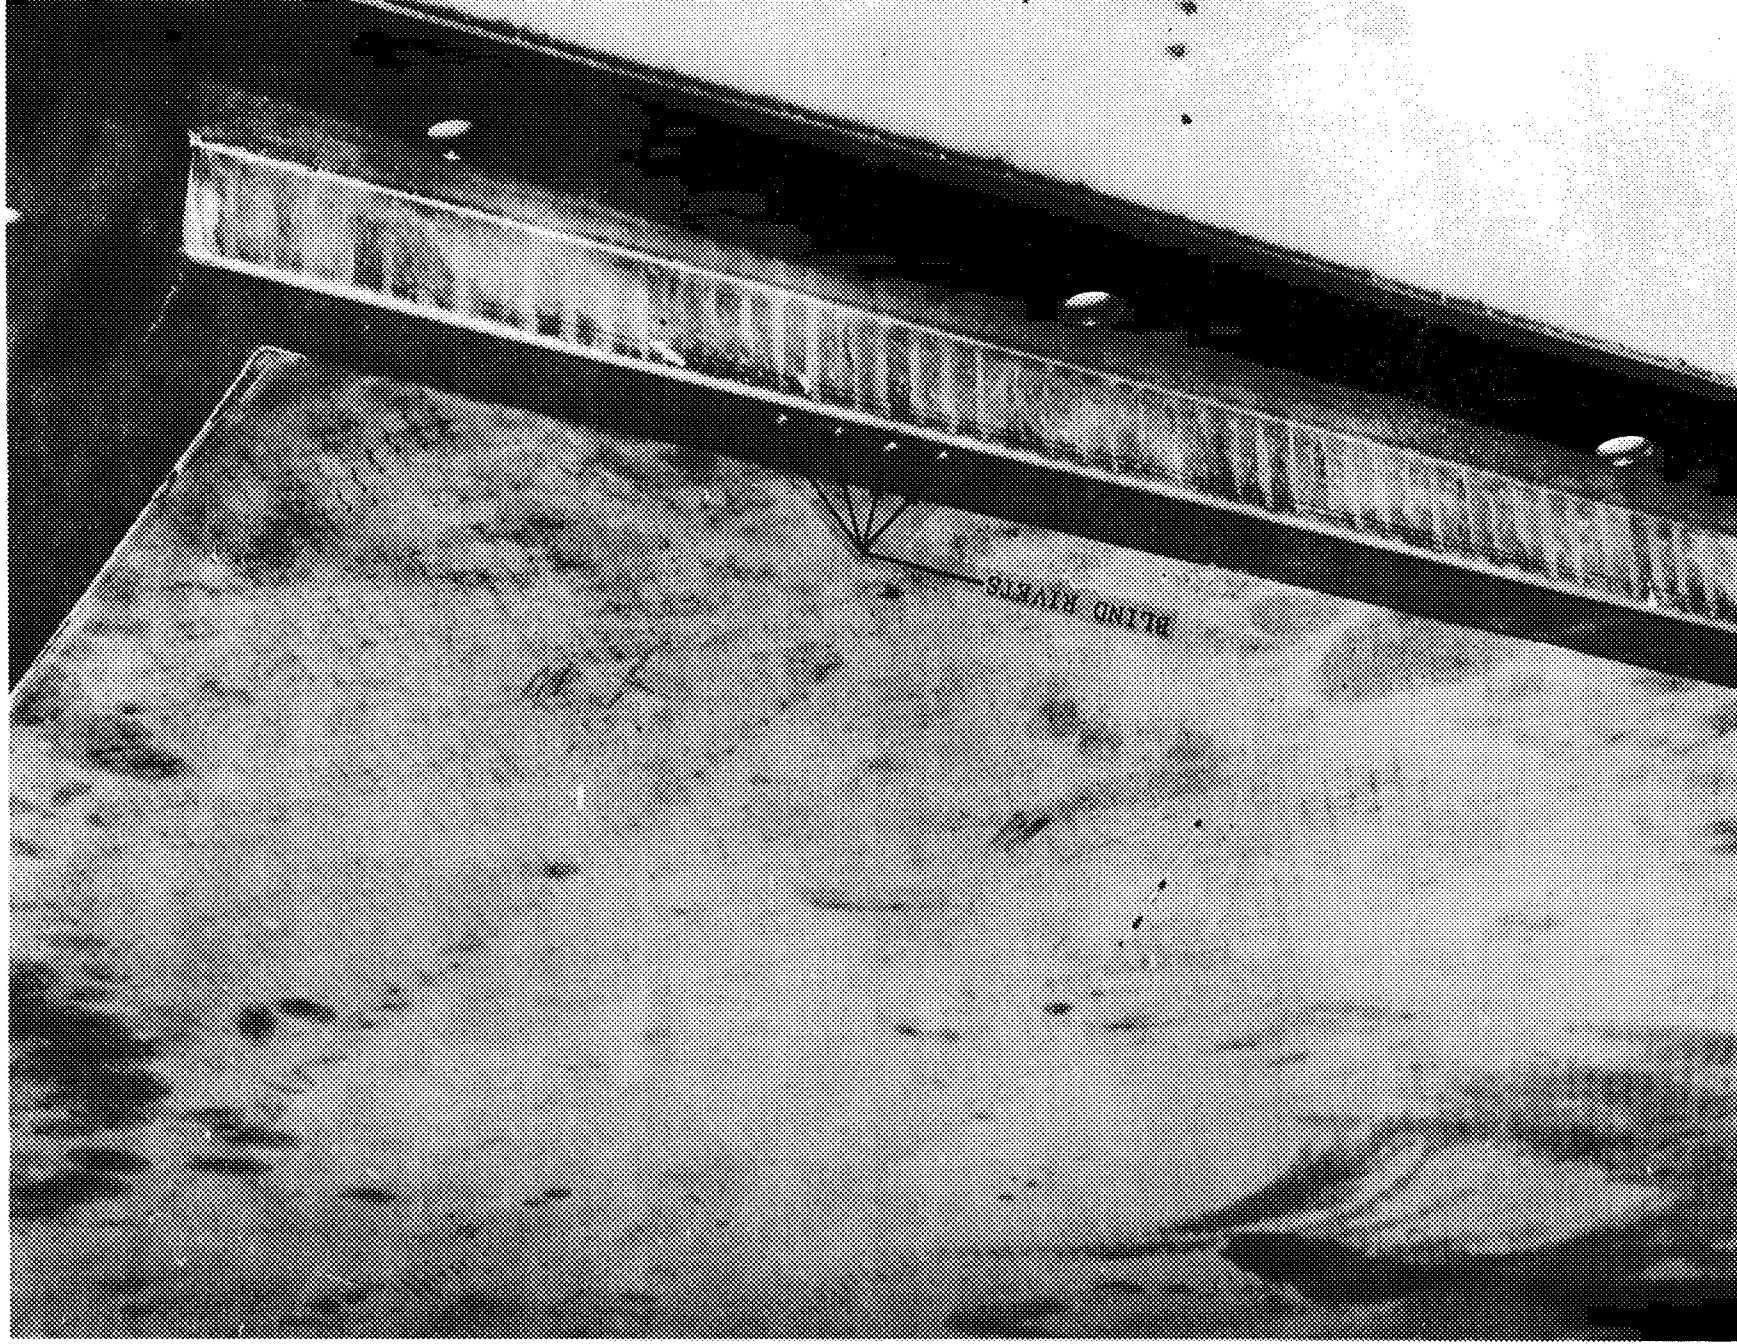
Typical Metal to Metal Brazed Void Repair with Mechanical Fasteners (Rivets)
